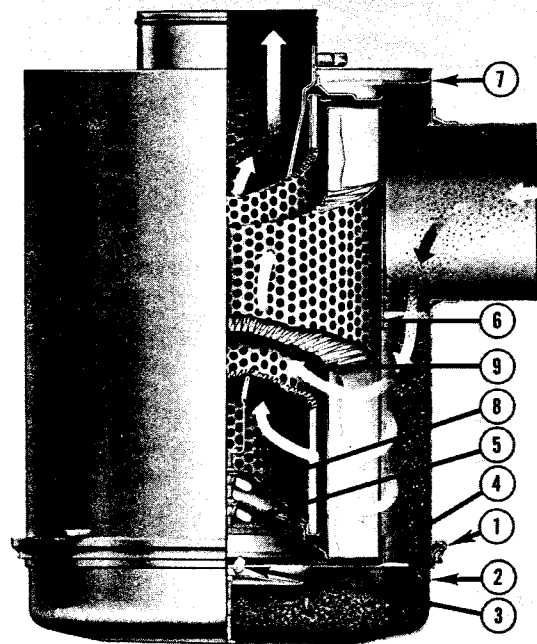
, (N11030). Air cleaner — heavy duty (dual element)
